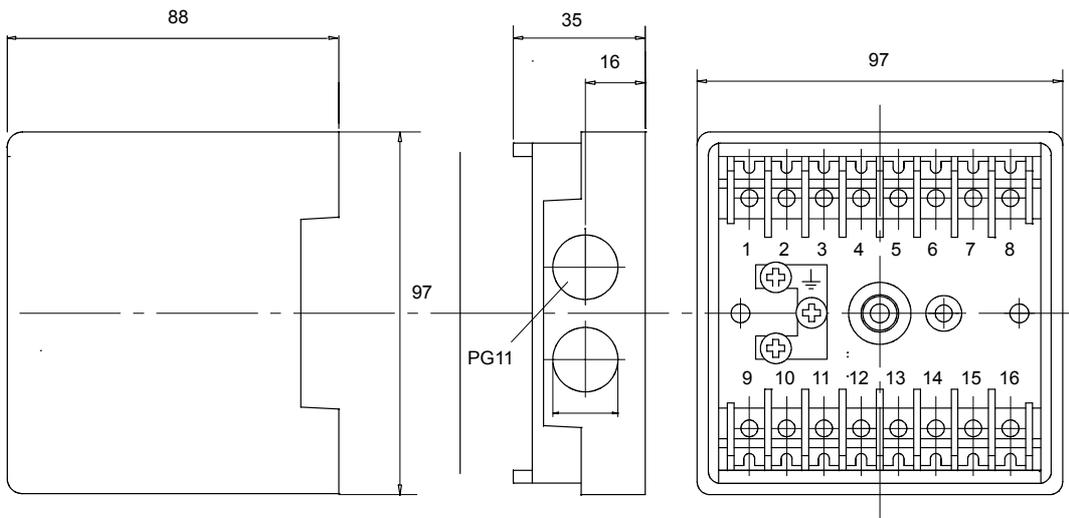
Mounting dimensions of A4021A and subbase in millimeters
